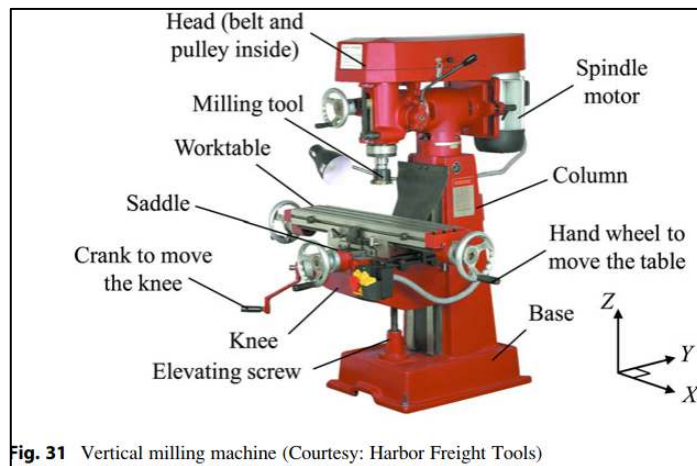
Vertical milling machine (Courtesy: Harbor Freight Tools)
